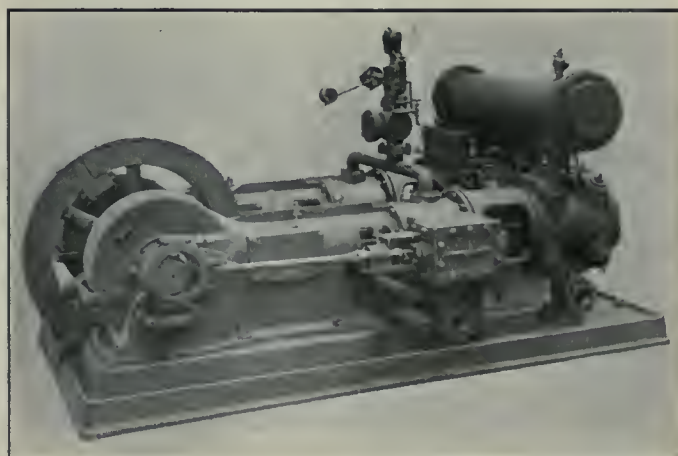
DUPLEX ENCLOSED FRAME, TWO STAGE, STEAM-DRIVEN AIR COMPRESSOR.
